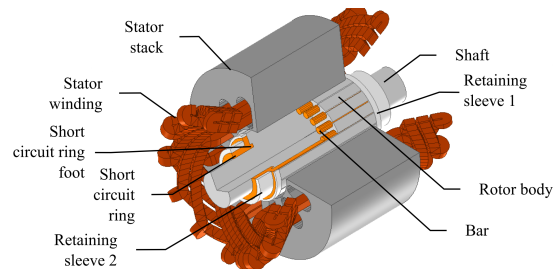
Model of the 6 kW, 120 000 rpm induction machine with a squirrel cage rotor.
